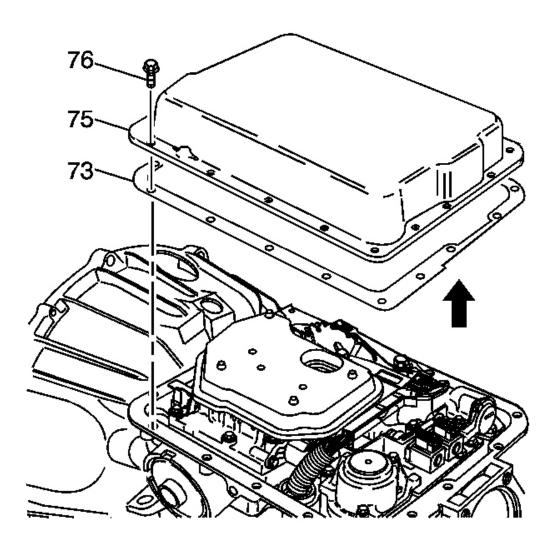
View Of Transmission Oil Pan & Gasket Courtesy of GENERAL MOTORS CORP.
